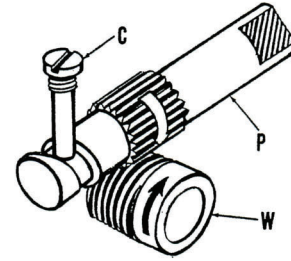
B—Automatic oil pump worm gear (W) driven by crankshaft turns plunger (P) at 1/20 engine speed. As plunger turns, cam on end of plunger engages cam screw (C) causing the plunger to go back and forth. Flat end of plunger acts as inlet and outlet valve.
